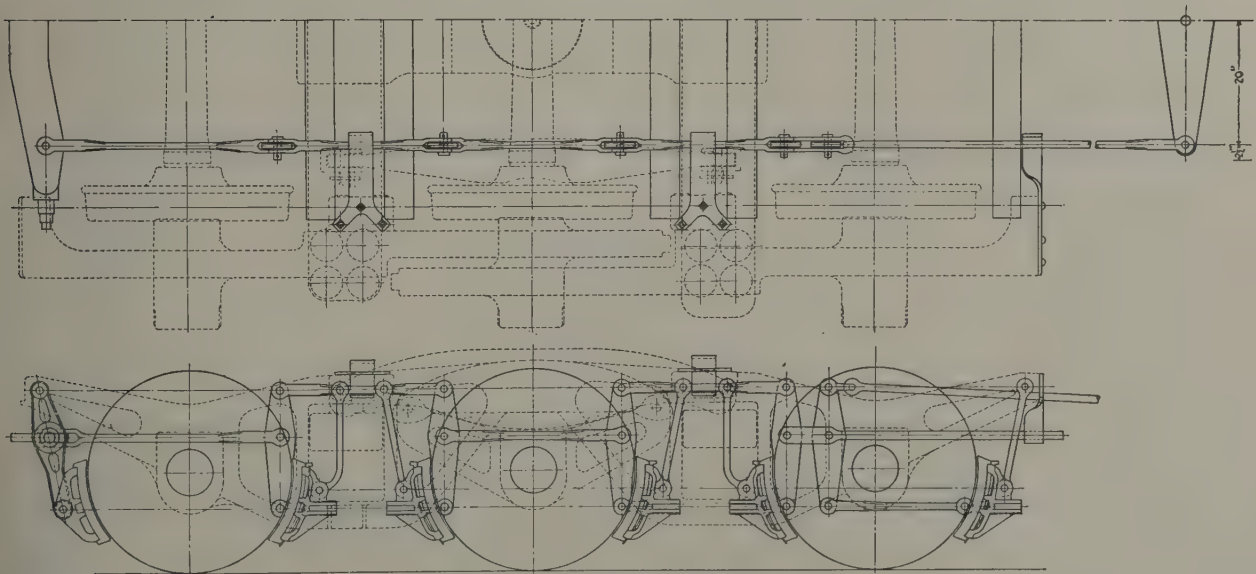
Clasp Brake Rigging on Buckeye Trucks under 120-Ton Gondola Cars for Virginian Railway. Buckeye Steel Castings Company.
